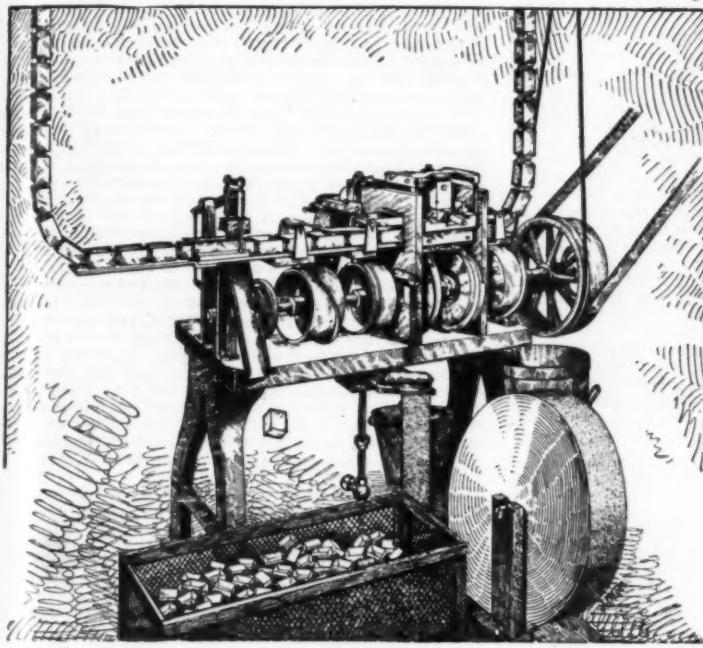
STRAWBOARD BOX-MAKING MACHINE.
